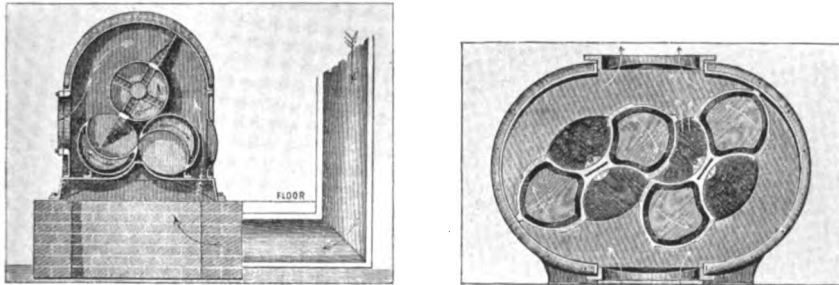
SECTION OF BAKRR AND GREEN PRESSURE BLOWERS, MADE BY THE WILBRAHAM BAKER BLOWER CO., PHILADELPHIA, PA.
